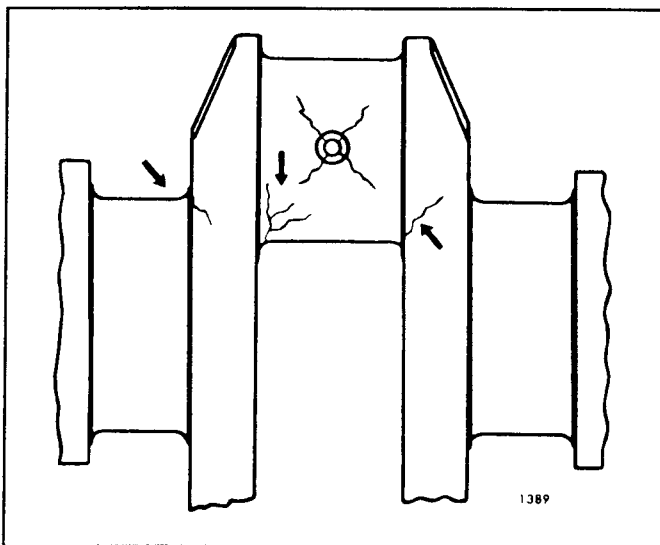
Crankshaft Fatigue Cracks
